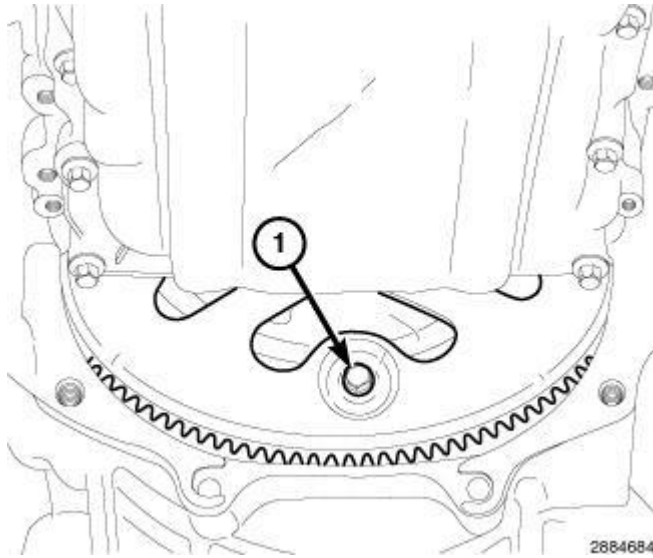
Flexplate/Torque Converter Retaining Bolts
